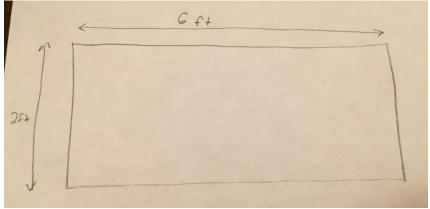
BENCH SURFACE DIMENSIONS – 6' X 2'
